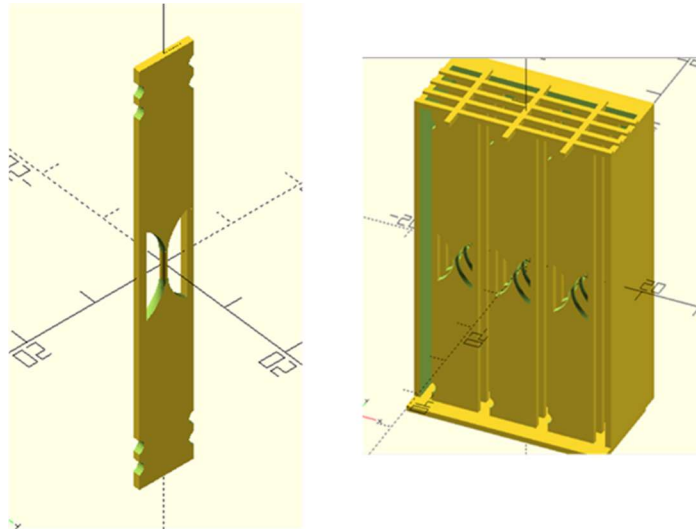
Design of single ligament test specimen and multiple specimen cassette
